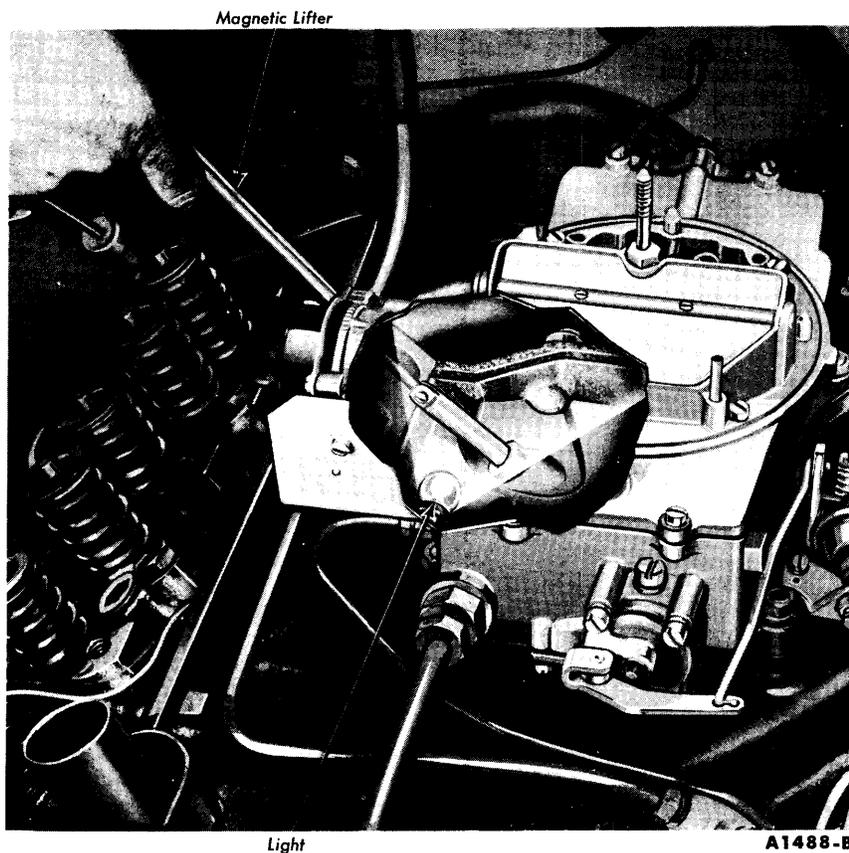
Valve Lifter Replacement—Intake Manifold Installed
